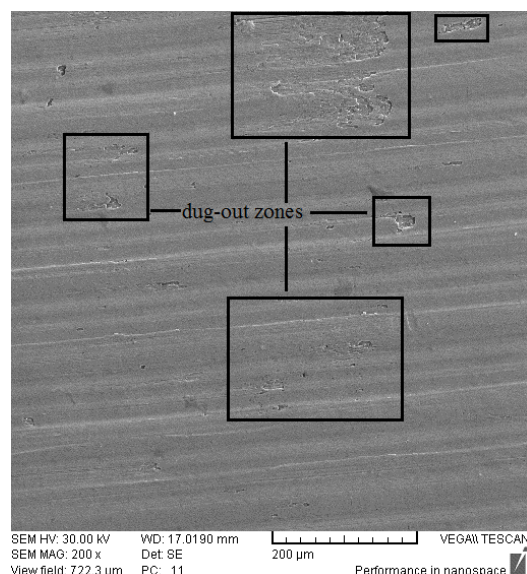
SEM image of dug-out zones on machined surface of work piece after turning with non-texture tool
